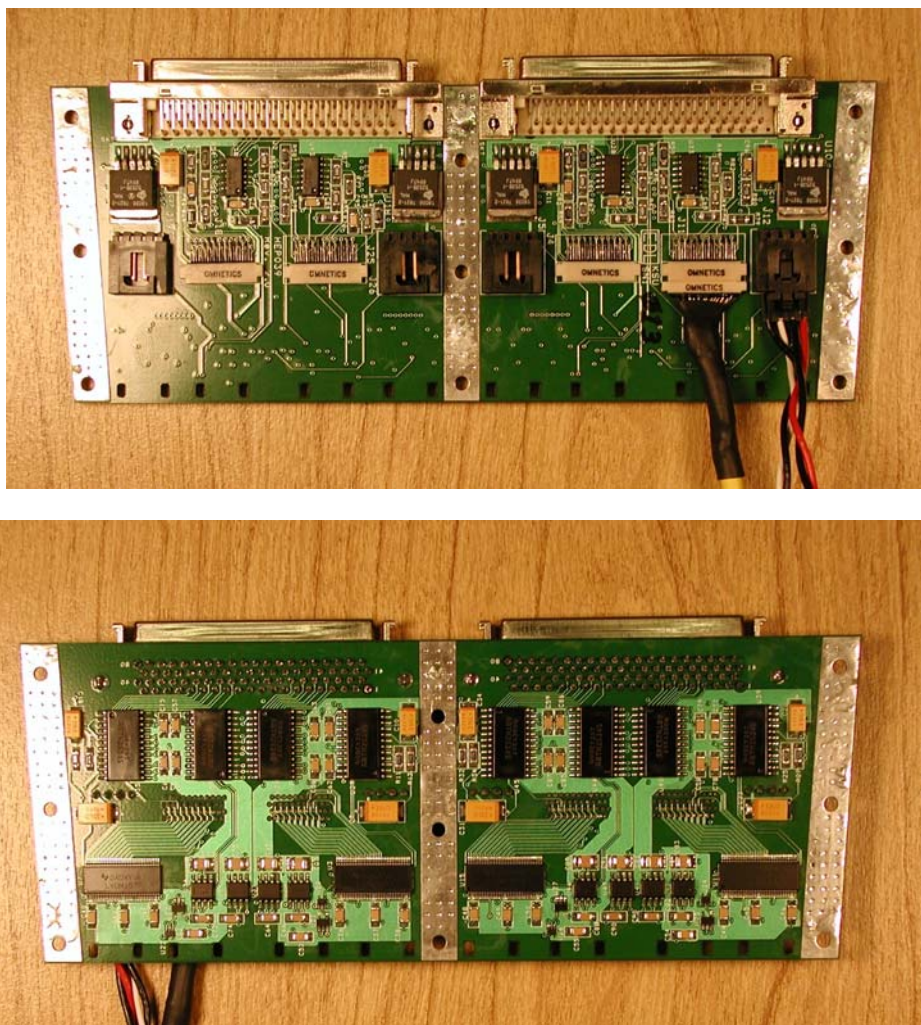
Top and bottom sides of a Run IIb prototype revision 2 adapter card. This version handles four hybrids.
